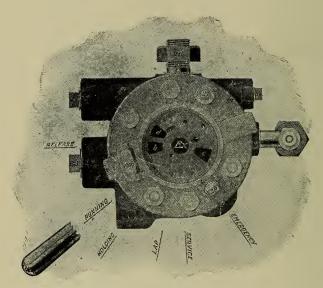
H-6 Brake Valve Rotary Valve Seat.
